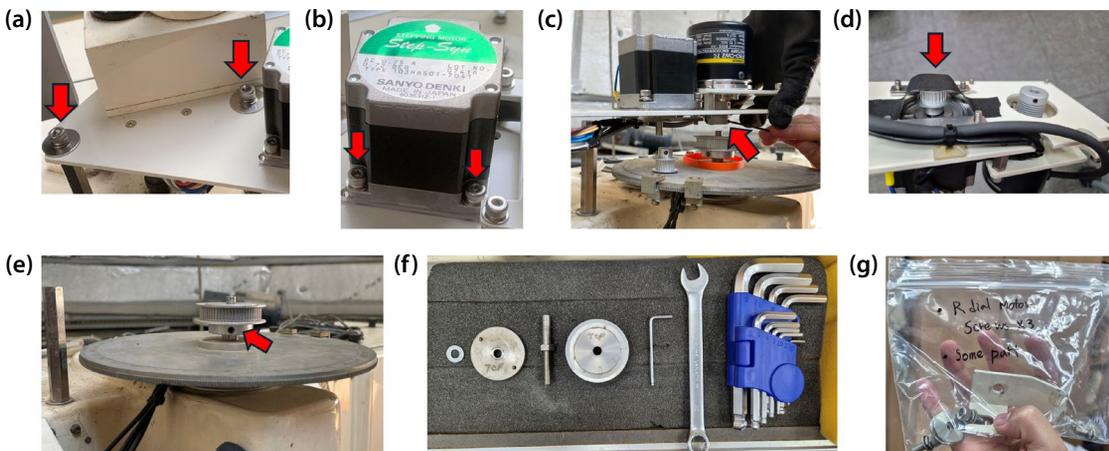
Process of R-dial disassembly. (a) Encoder panel separation, (b) Step motor position adjustment, (c) Loosening the coupler, (d) Drive belt pulley fixing, (e) R-dial plate, (f) A shaft and two pulleys from R-dial, and (g) Screws and small parts.
